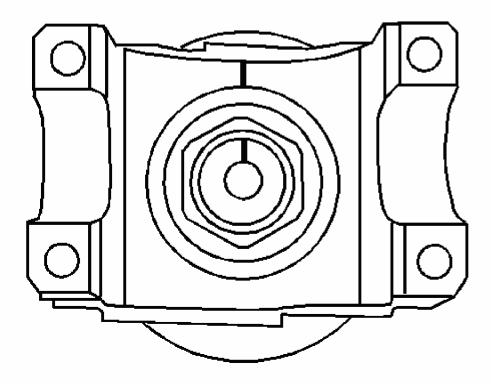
View Of Pinion Shaft & Pinion Yoke Alignment Marks Courtesy of GENERAL MOTORS CORP.
